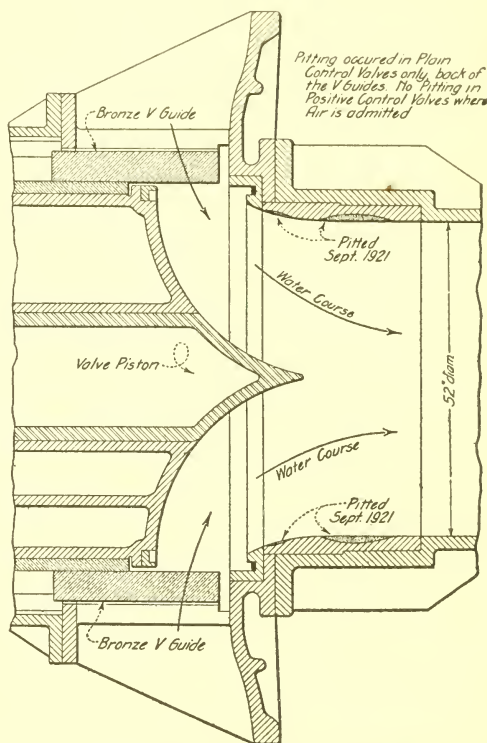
Pittings of upper outlet castings, Arrowrock Dam.
